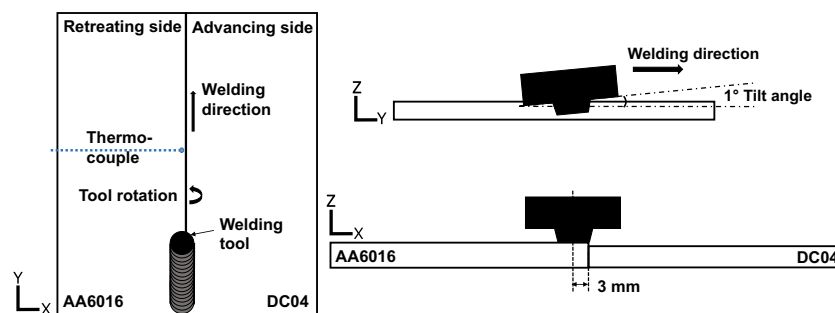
Schematic representation showing (left) work-pieces in butt-weld configuration with aluminum on the retreating side and steel on the advancing side, welding direction, tools rotational direction and
